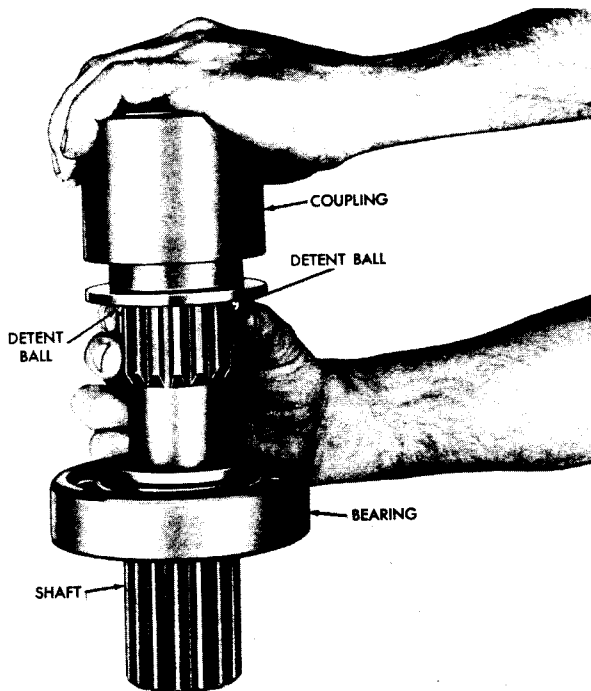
Installing coupling onto front-output shaft ^{S2440}
